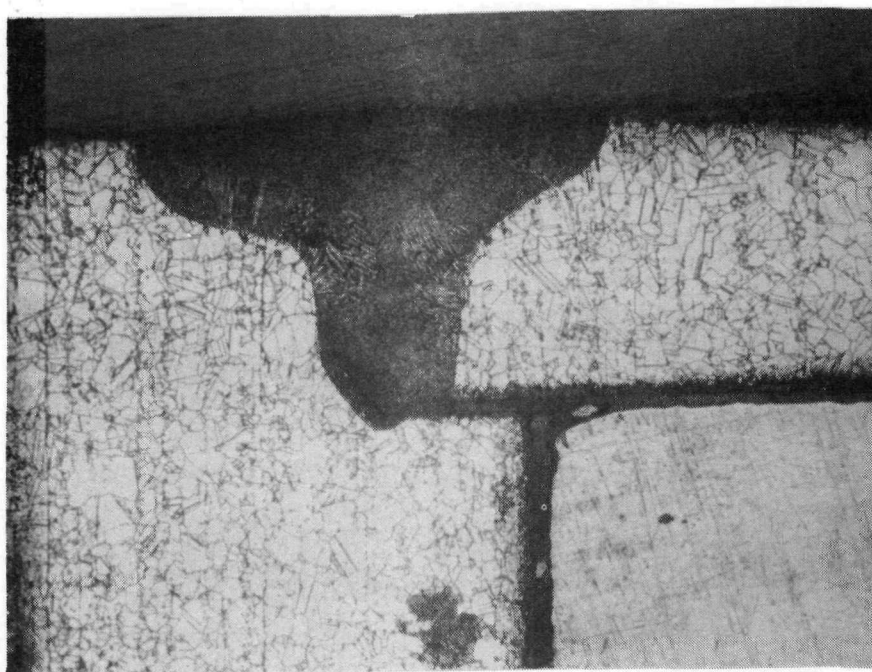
Cross-Sectional Views of Cap Welded into Inner Capsule (30X)
